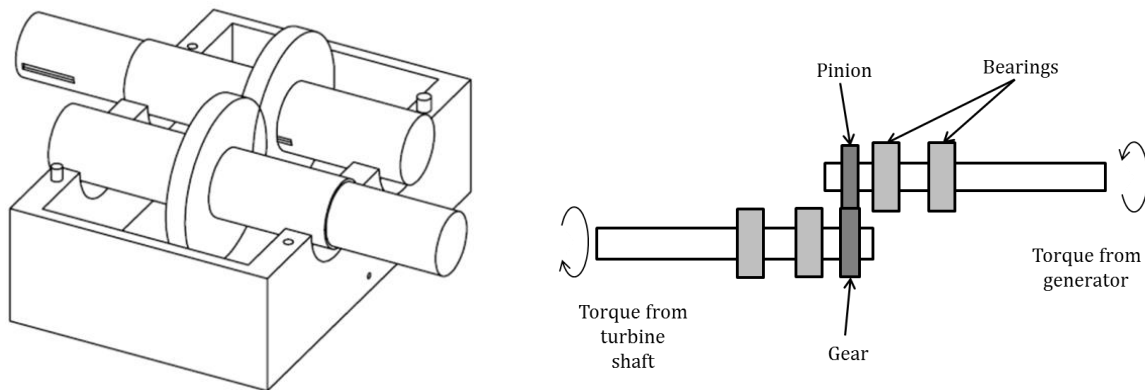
Horizontal split casing (left) and improved shaft configuration (right)
